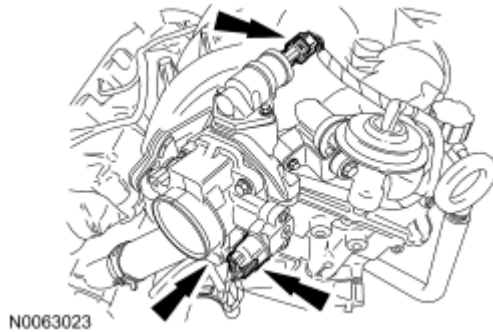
Identifying (IAC) Valve And (TP) Sensor Connectors
